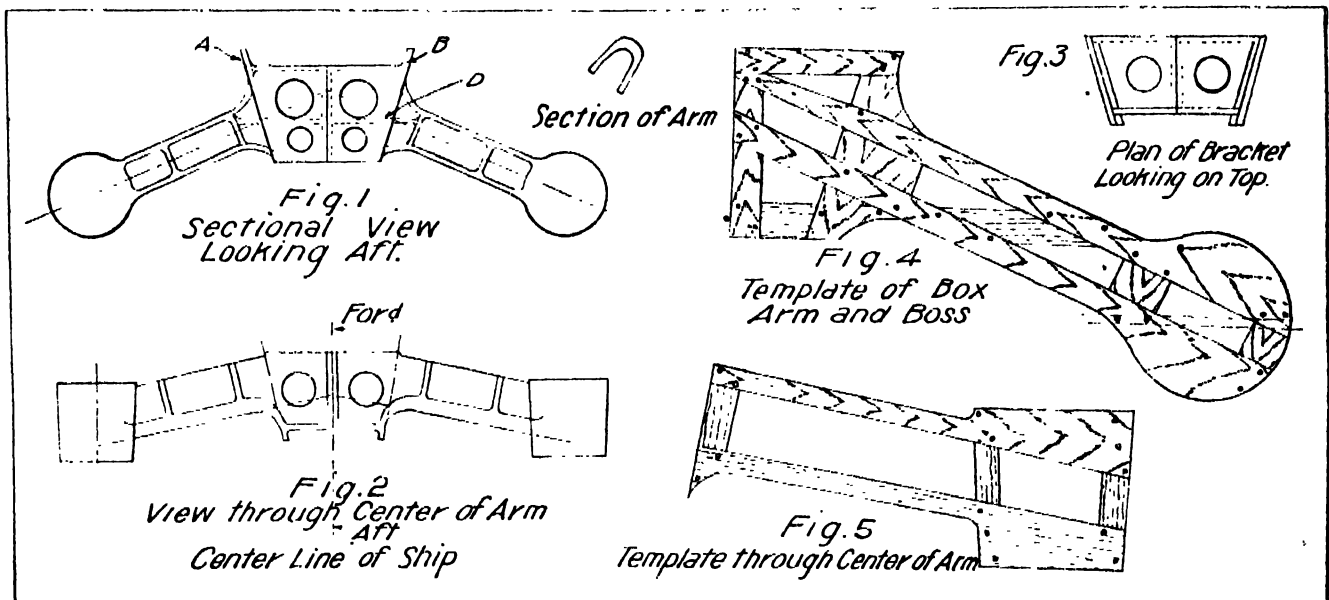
SECTIONAL VIEW OF DOUBLE SHAFT BRACKET. FIG. 2 VIEW THROUGH CENTER OF ARMS OF DOUBLE SHAFT BRACKET FIG. 3—PLAN OF BRACKET FIG. 4—TEMPLATE FOR BOX, ARM AND BOSS FIG. 5—TEMPLATE FOR CENTER OF THE ARM
